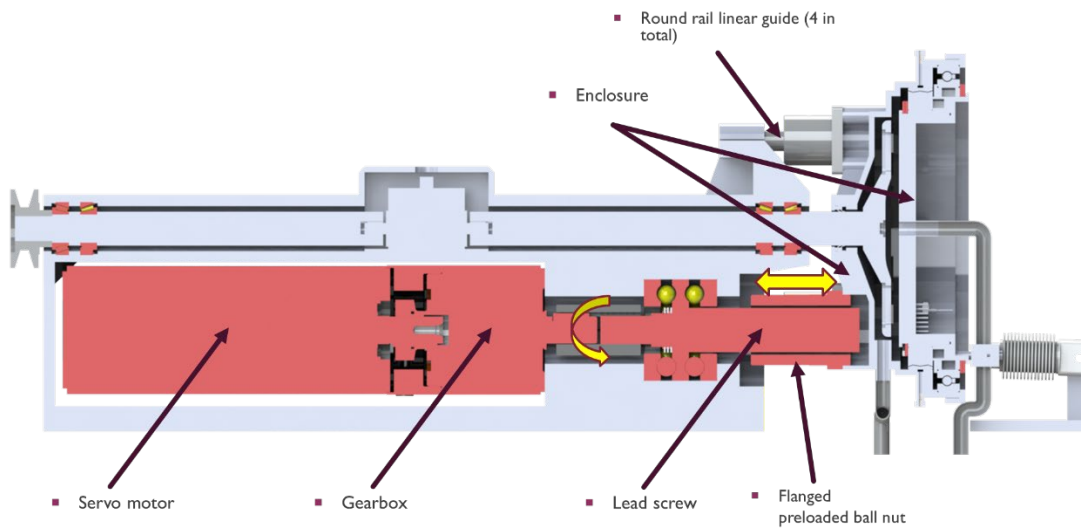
Parts that contribute to the reciprocating linear motion of the enclosure surrounding the clutch disk
